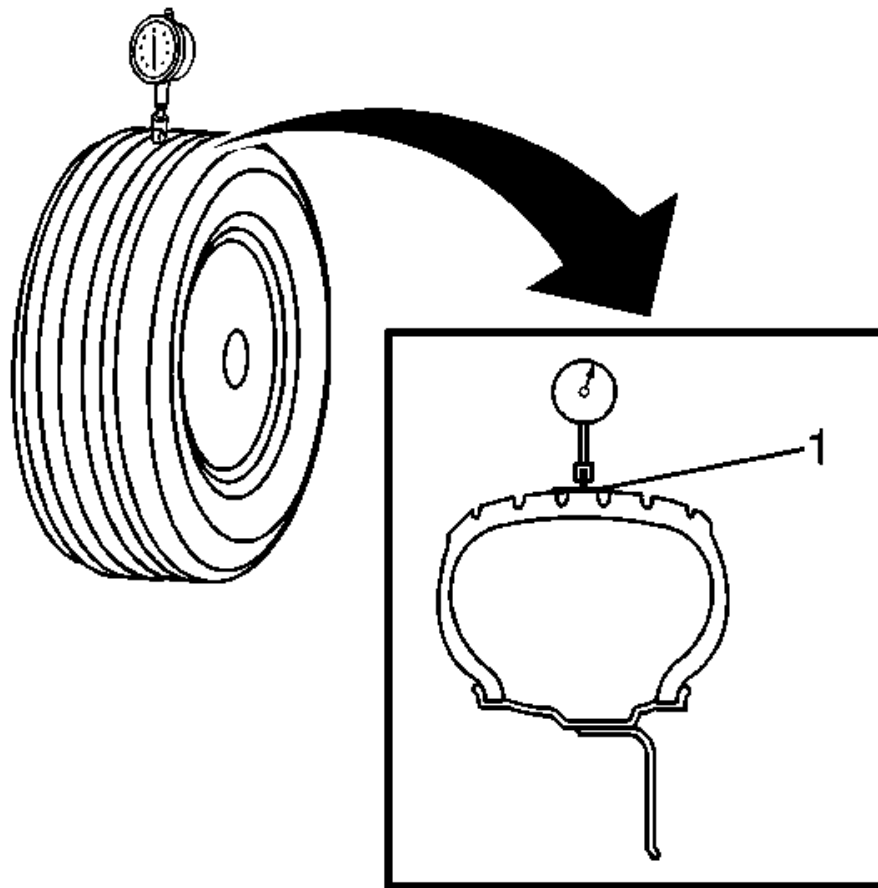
Measuring Tire & Wheel Assembly Radial Runout
